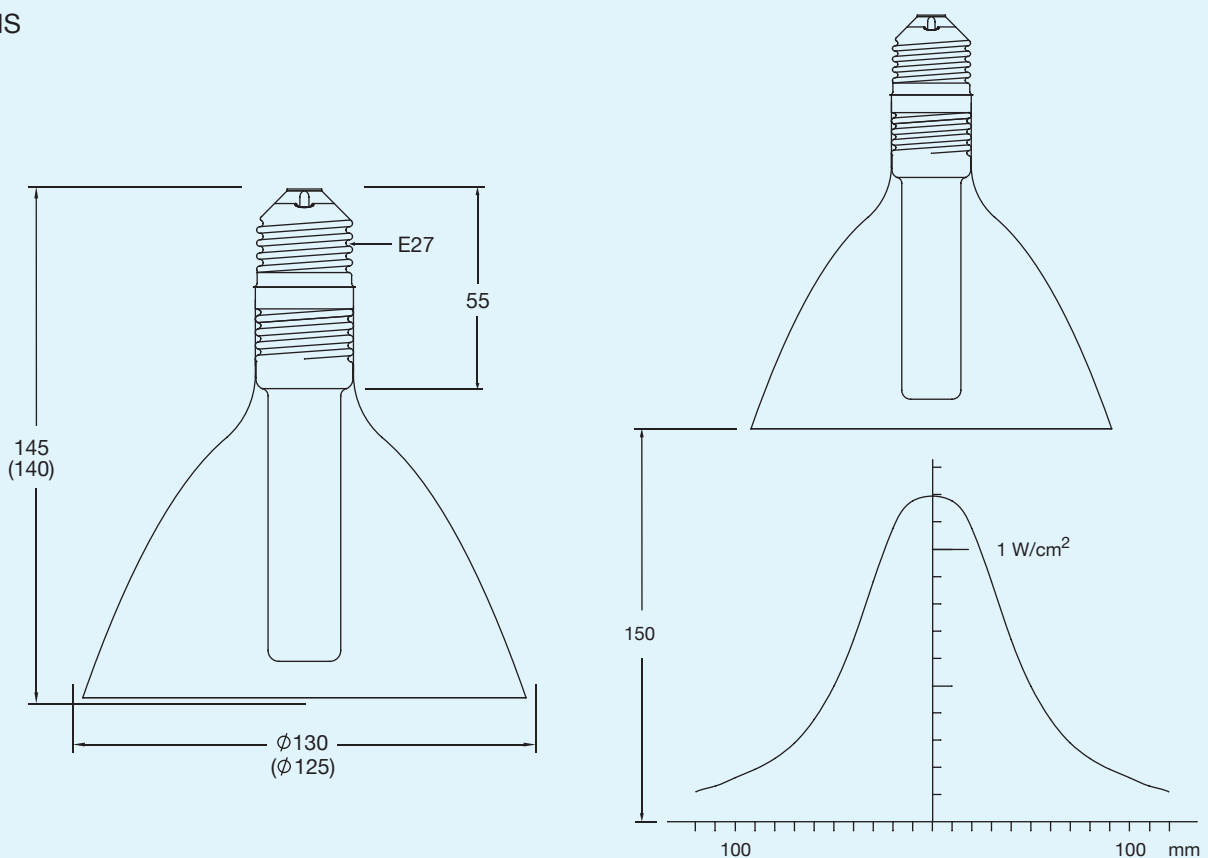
Mounting dimensions and radiator dimensions ( ) in mm and power distribution
